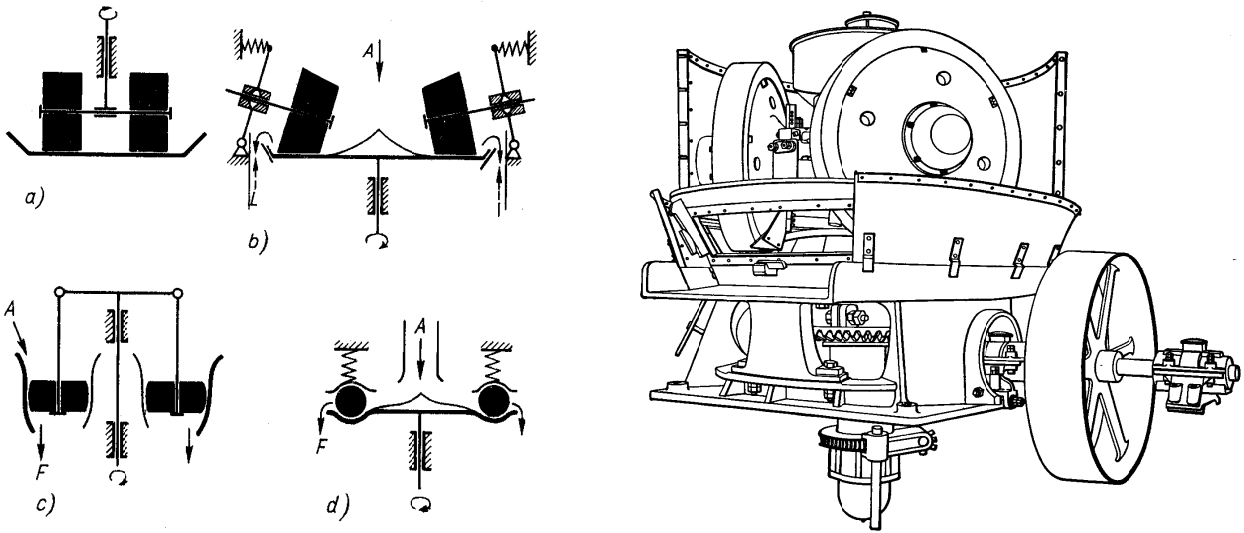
Principle design of roller mills: a,b=pan mills, c=ring roller mill, d=ring ball mill (left). Garfield Chili mill (right) [Schubert Vol. I / Source unknown].
